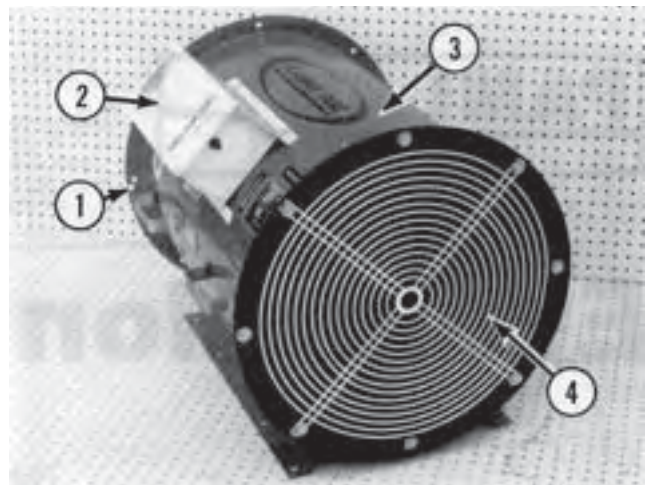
Flaman Model FCJ-18-3-1 Fan: (1) Mounting Flange, (2) Motor Control, (3) Fan Housing, (4) Guard Grill and Inlet Bell.
